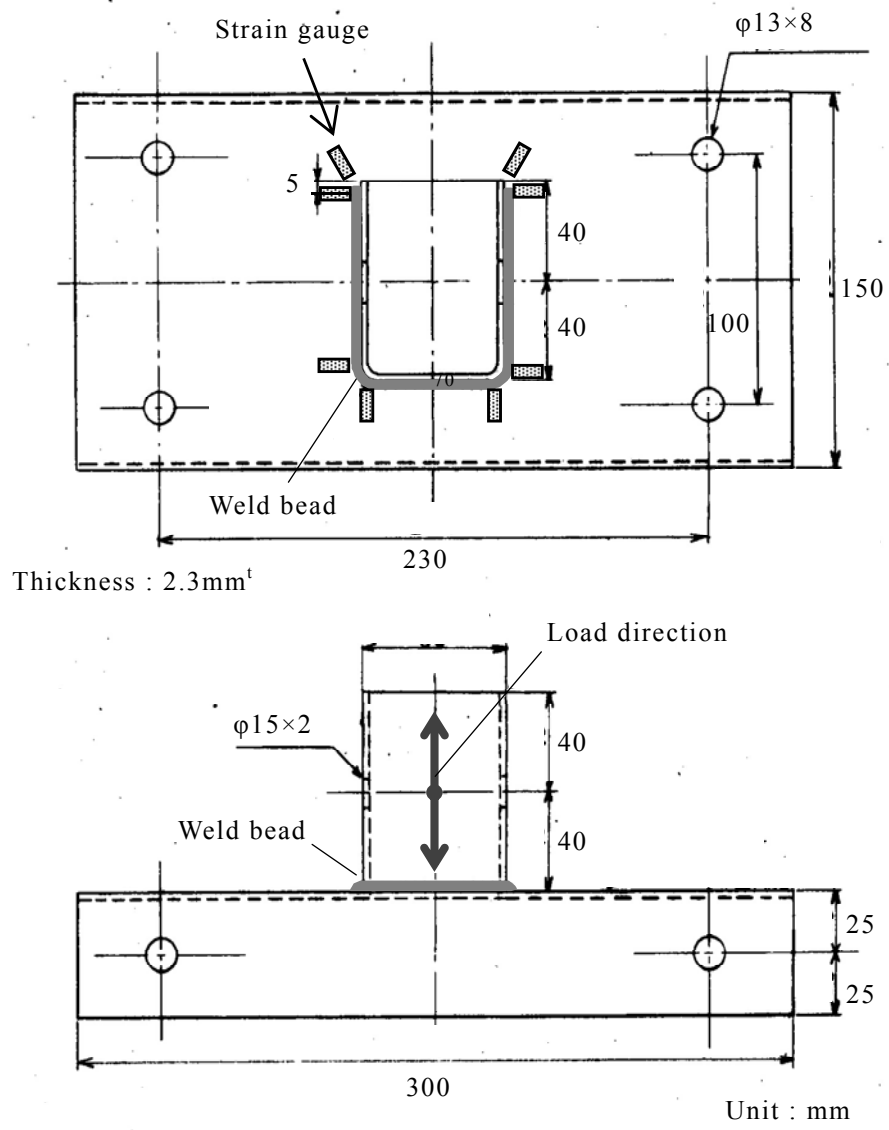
Schematic of T-joint(T-shape-type arc welded joint)
